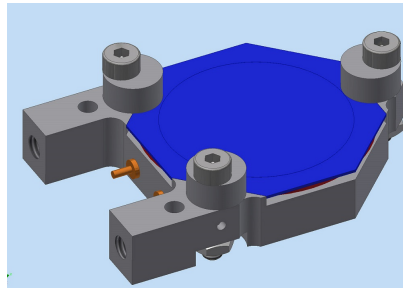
CAD drawing of the second design of the mount for the PIPS detector
